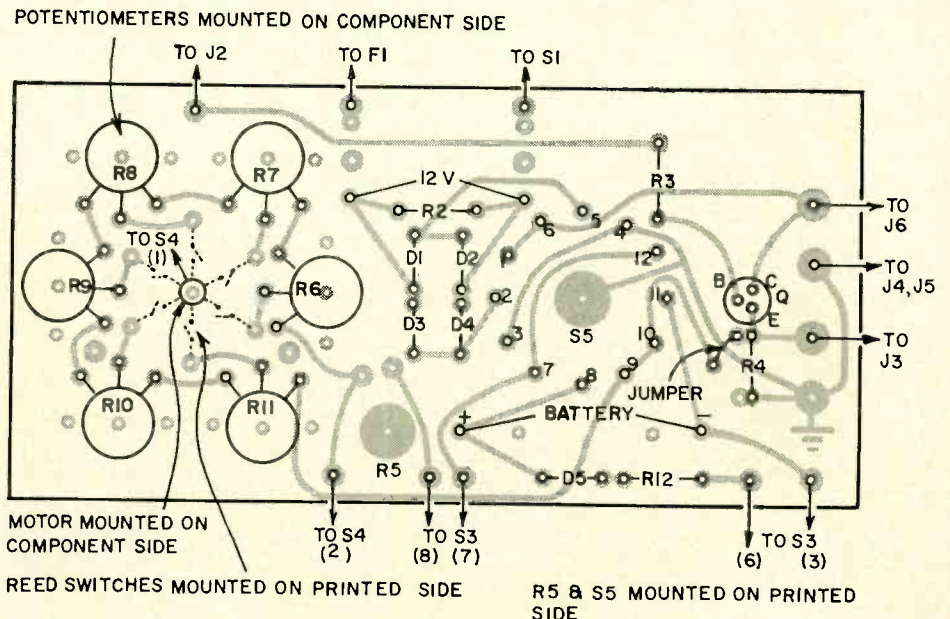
a—Make a photocopy exactly twice this size and you have the pattern for laying out the PC board. b—(below)—Here's where the parts are mounted on the PC board.
